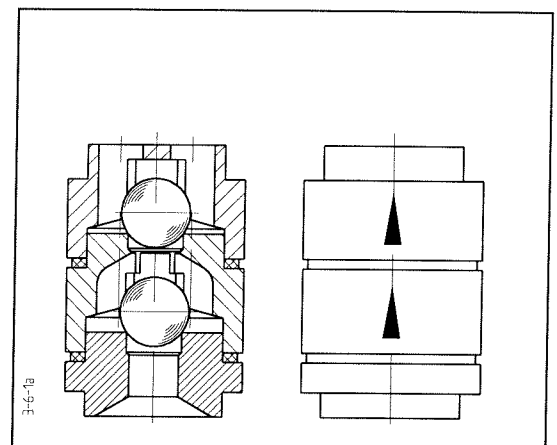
Double Ball Valve - Sectional and Plan View
